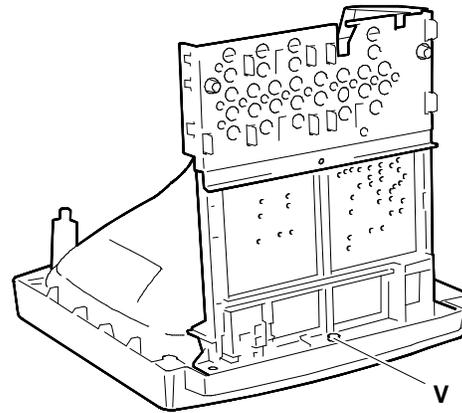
Position of screw that fixes motherboard support structure to video casing
